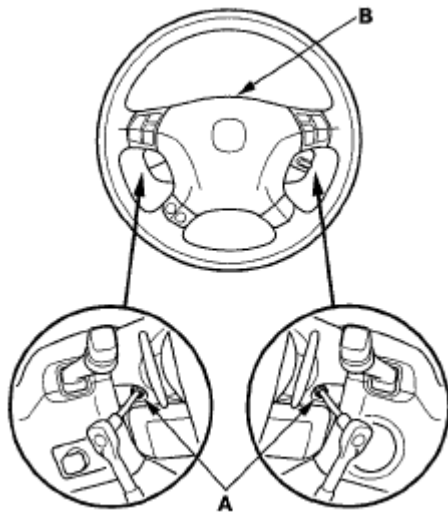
Removing/Installing Torx Bolts Using TORX T30 Bit
